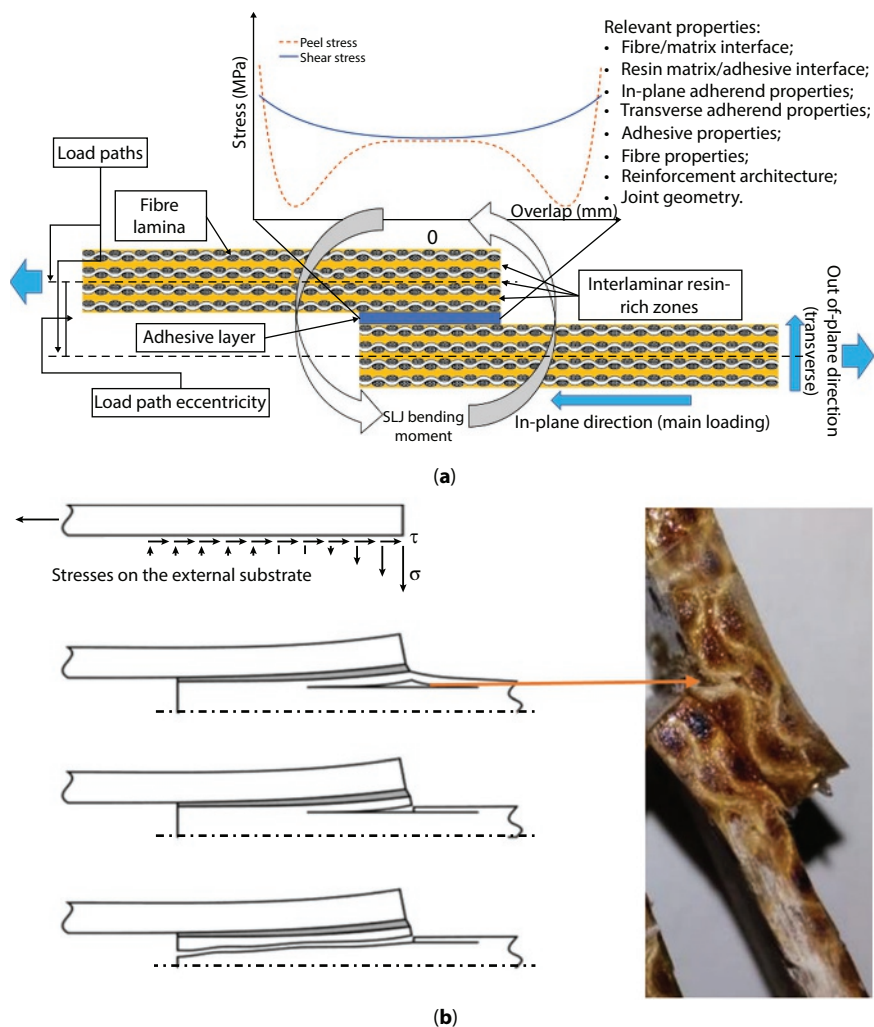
Schematic of composite bonded joint stress state and relevant parameters (a); examples of failure modes of NFRC bonded joint (b).
